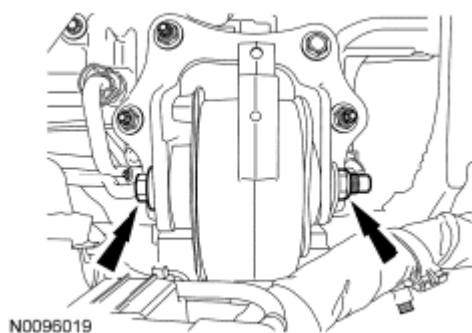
Locating Nut & Transaxle Mount Through Bolt
